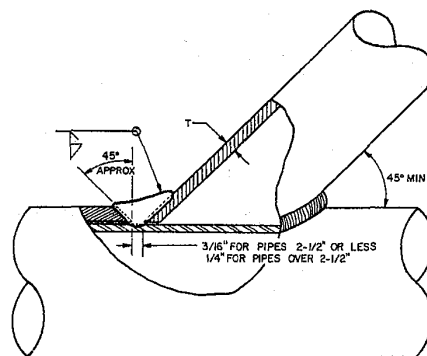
Fillet Reinforced External Root Connection, Single Bevel, Welded Both Sides
